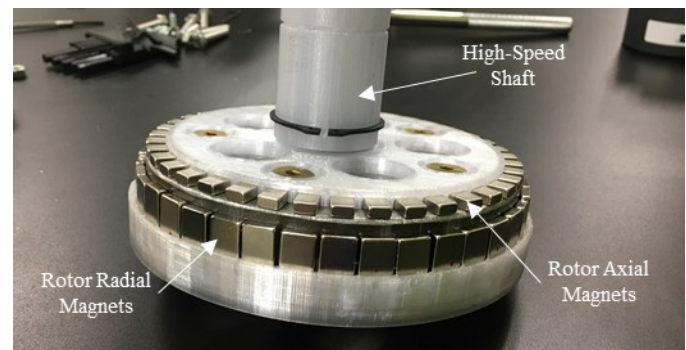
The rotor assembly, pictured with one spacer removed to show magnet layout.
